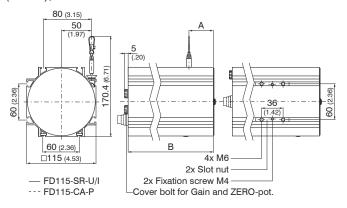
Dimensional drawing ... - FD115 - U/I/P, measuring ranges 7.500 ... 15,000 mm dimensions in mm (inches), not to scale
